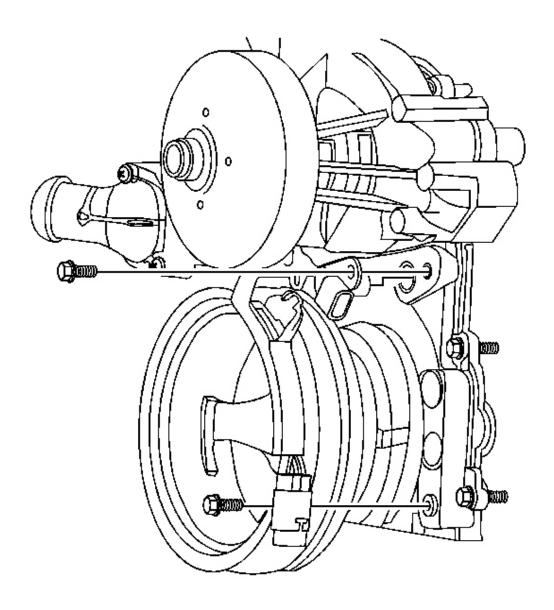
Camshaft Sensor Bolt & Sensor Courtesy of GENERAL MOTORS CORP.
